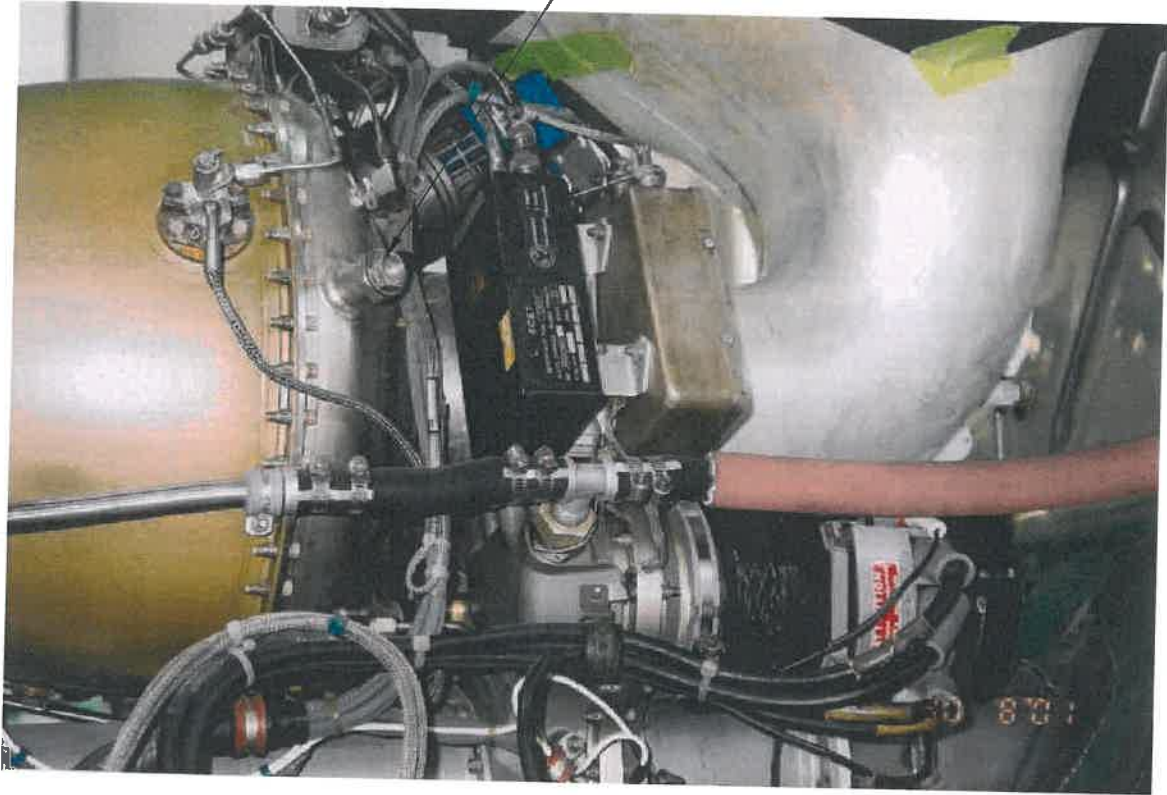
D4931-X ENGINE FITTING REMOVAL
